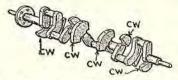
Counterbalance weights applied to a six-cylinder crank shaft.
